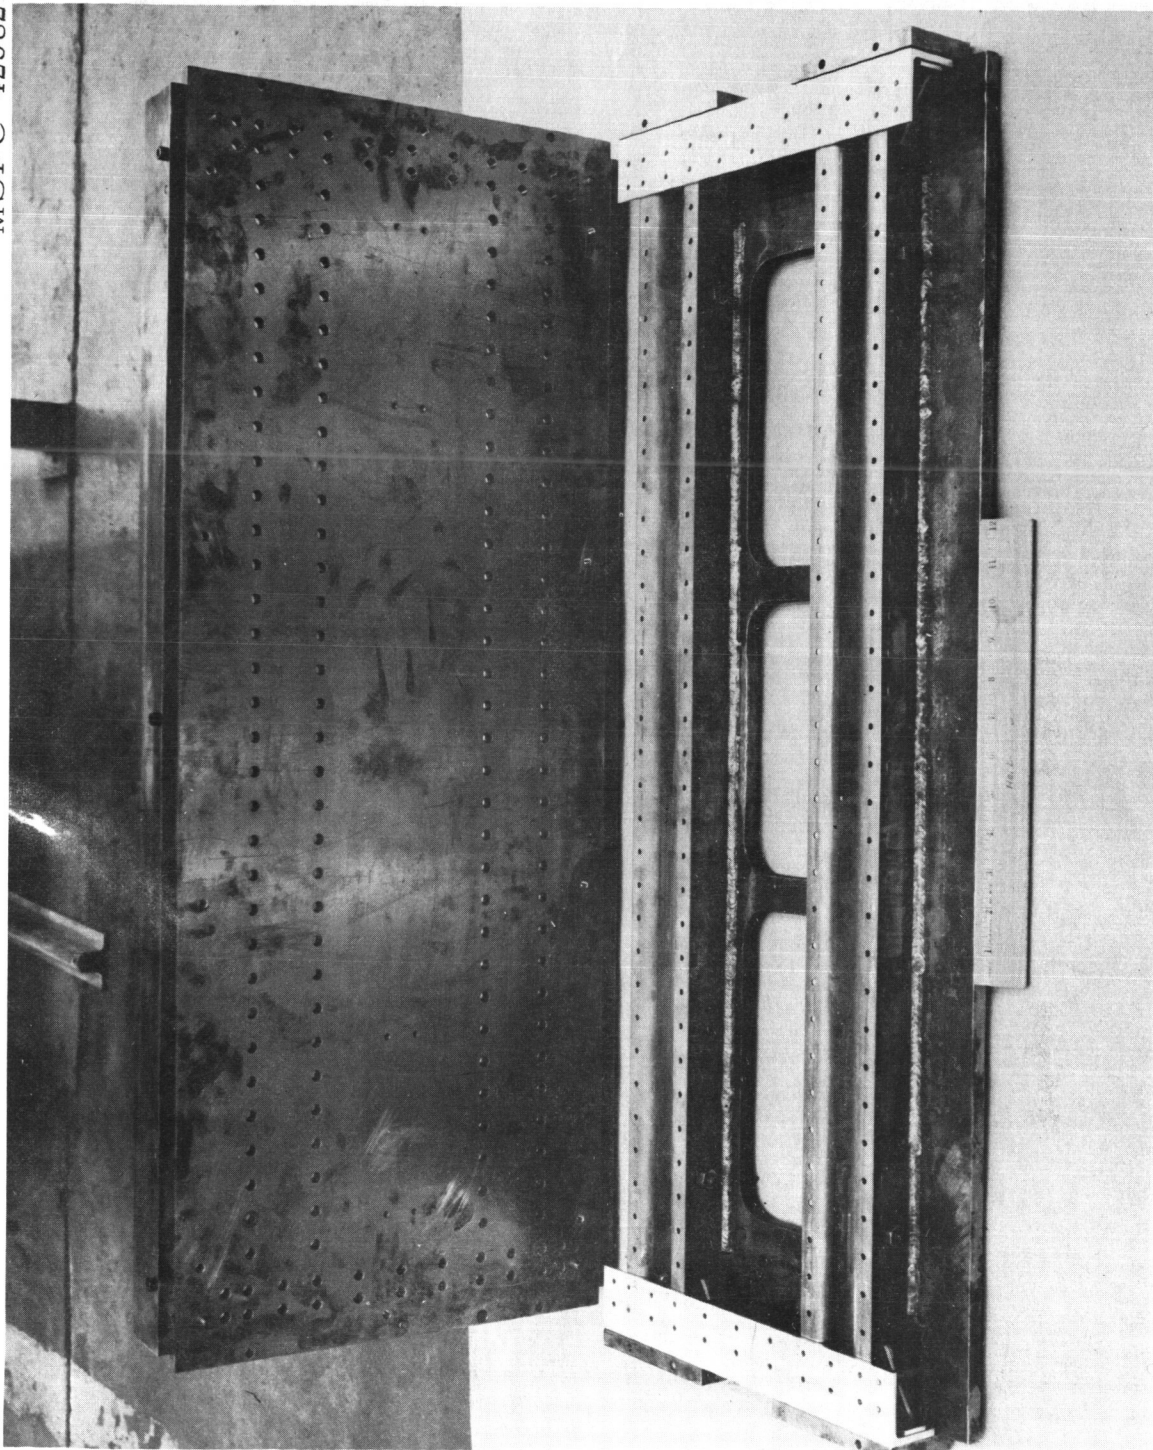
DRILL JIG WITH INSTALLED "HAT"
